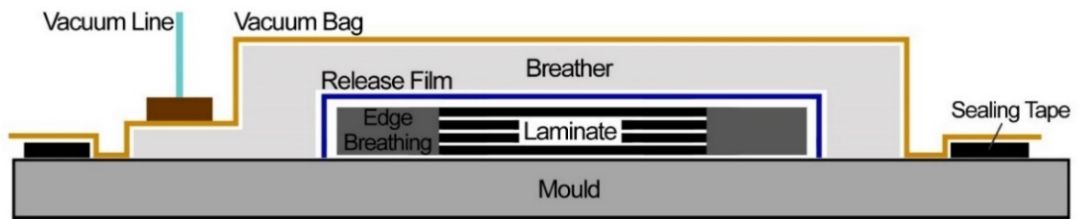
Schematic layout of the VBO technique for OoA processing
